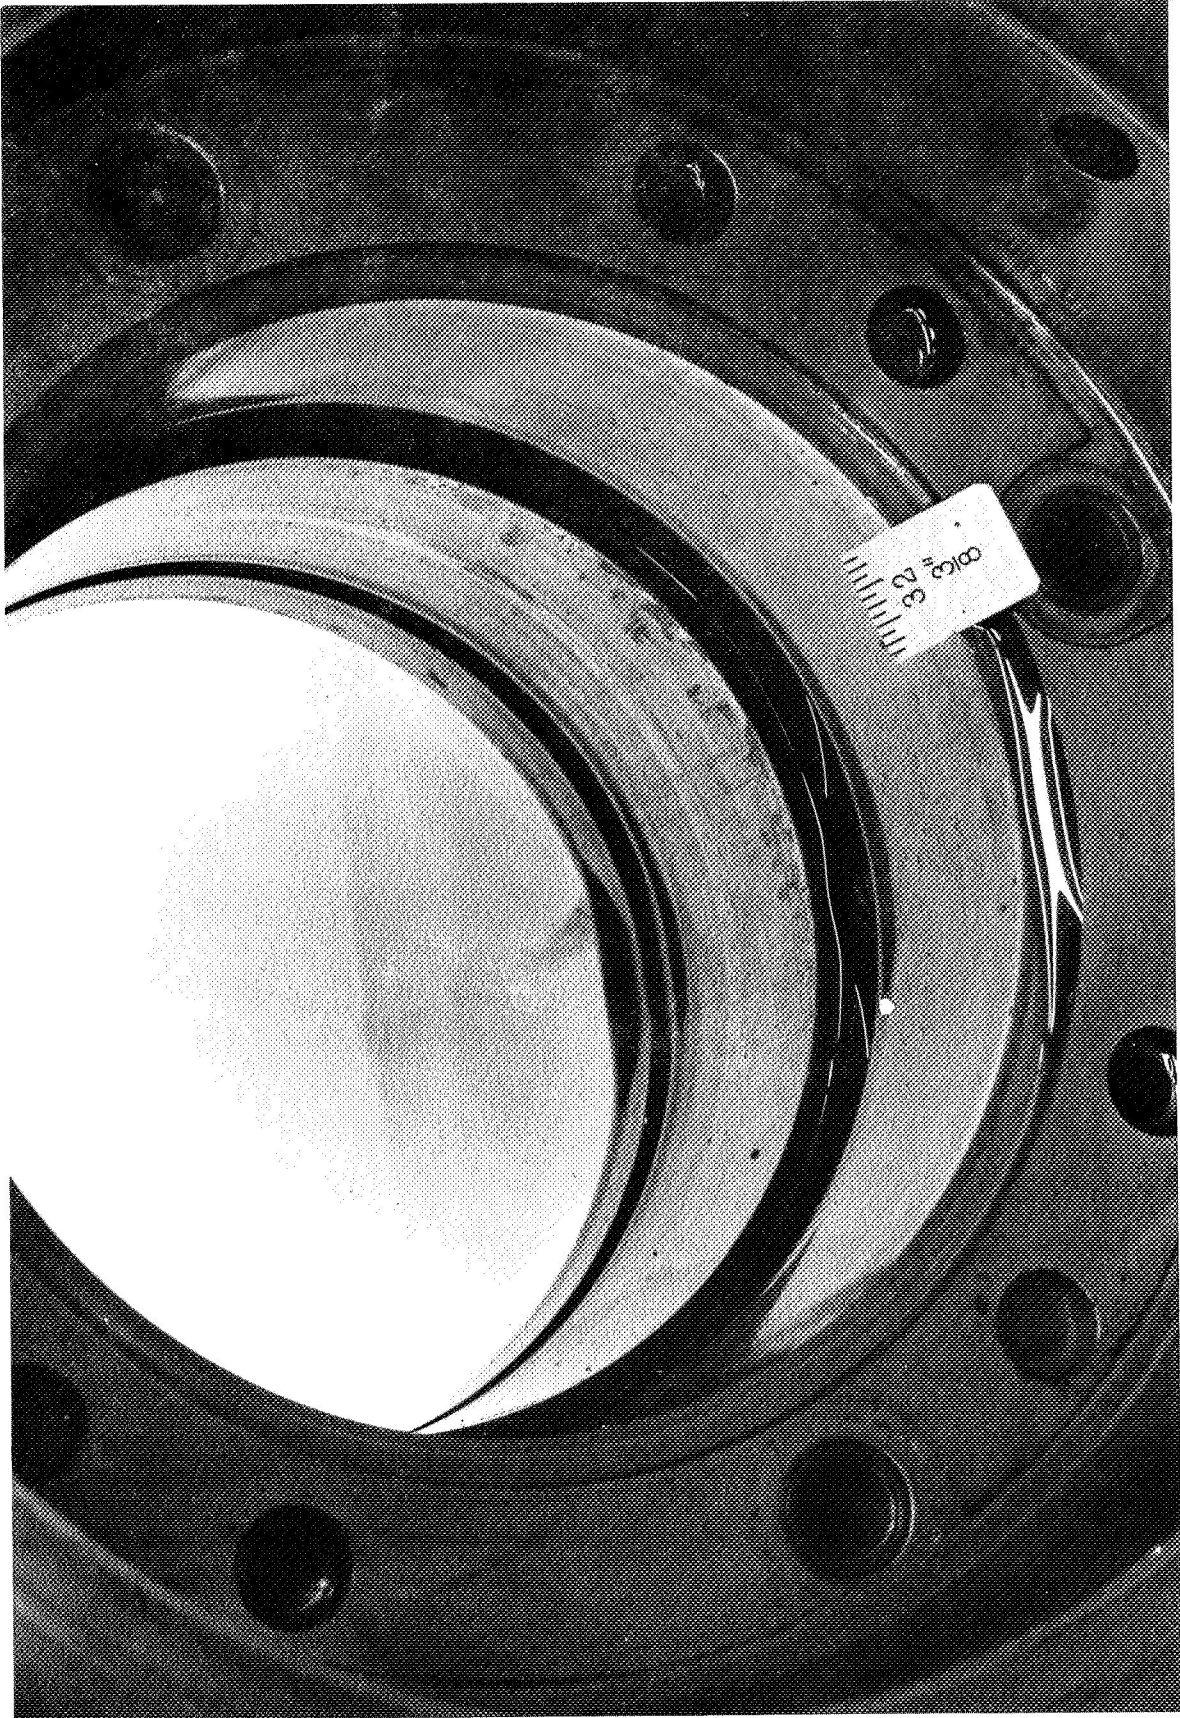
ALTERNATOR DRIVE END SHOWING LOCATION
